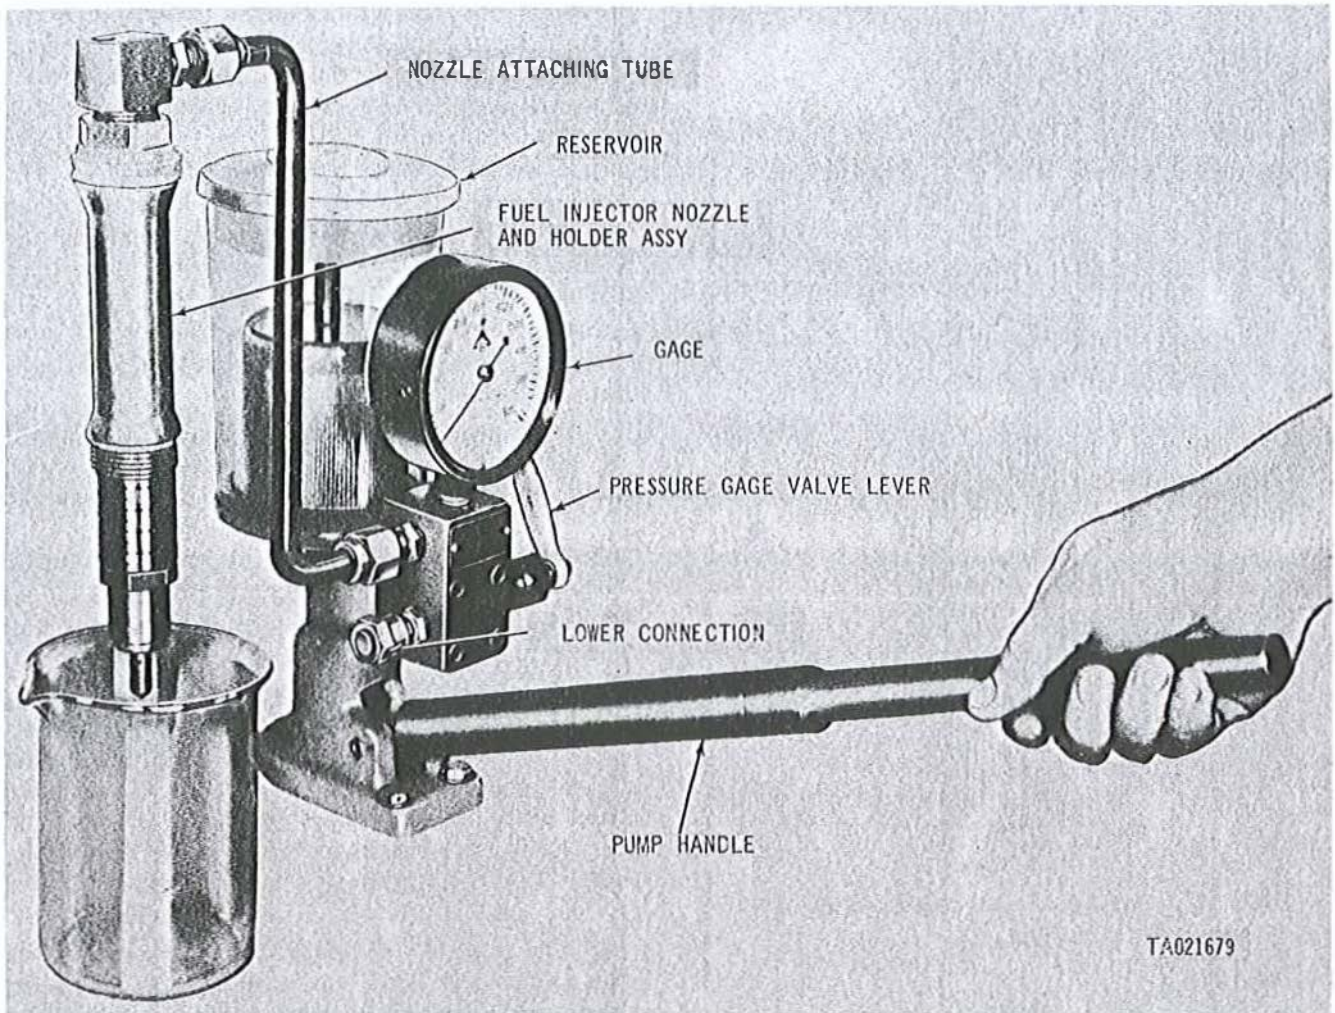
Testing fuel injector nozzle and holder assembly.
